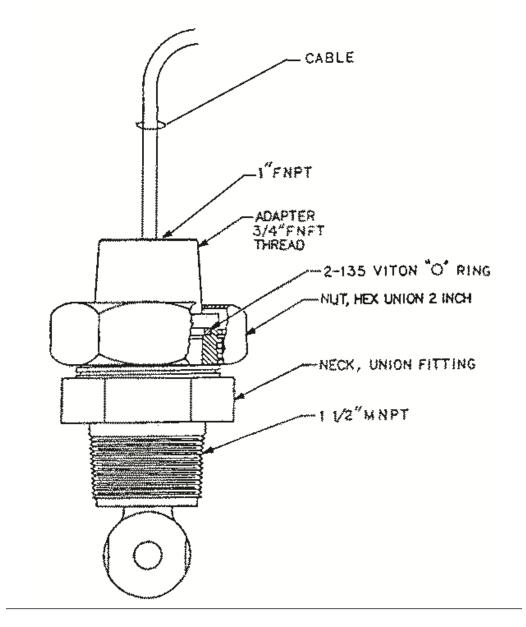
Insertion adapter 23242-02 for use with 3/4 in. MNPT threaded process connection (-21 option)
